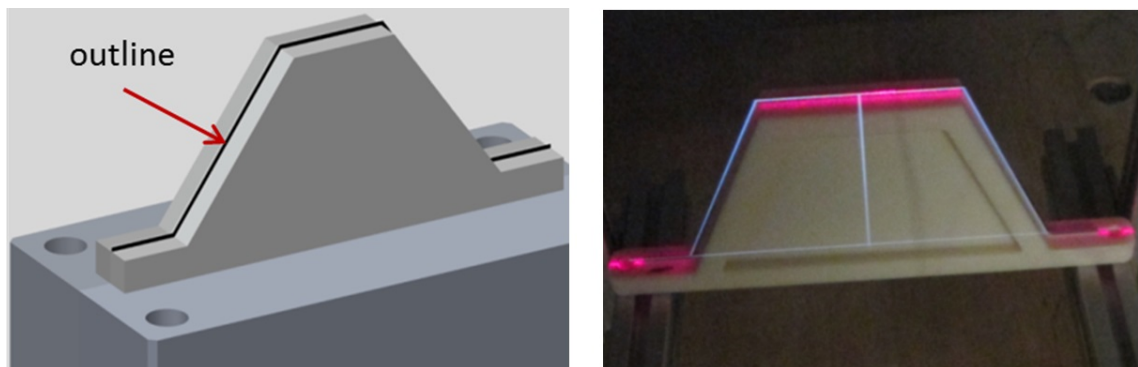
Laser plane alignment: A) Trapezoid-shaped tool with outline shown. B) Alignment of reflected 2D sketch, tool outline and laser line confirming correct alignment of laser plane with virtual plane.
